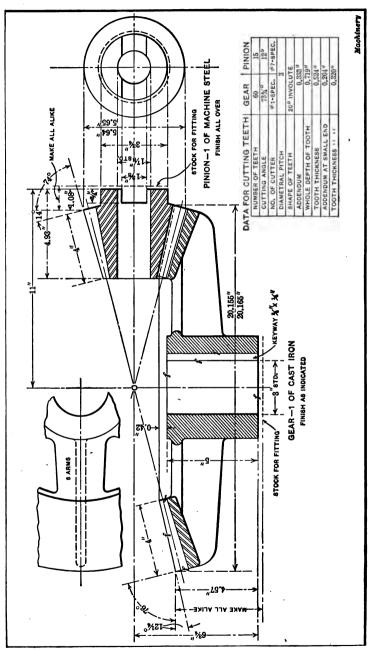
Model Working Drawing for Bevel Gears to be cut with Formed Milling Cutter
